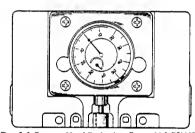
Cassette Head Projection Gauge (AJ-751180)
